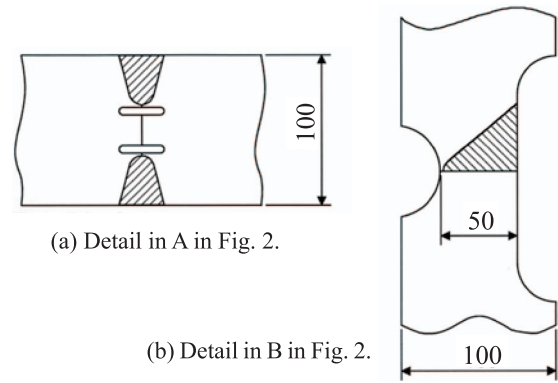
Sketches of weld groove of each butt joint.
